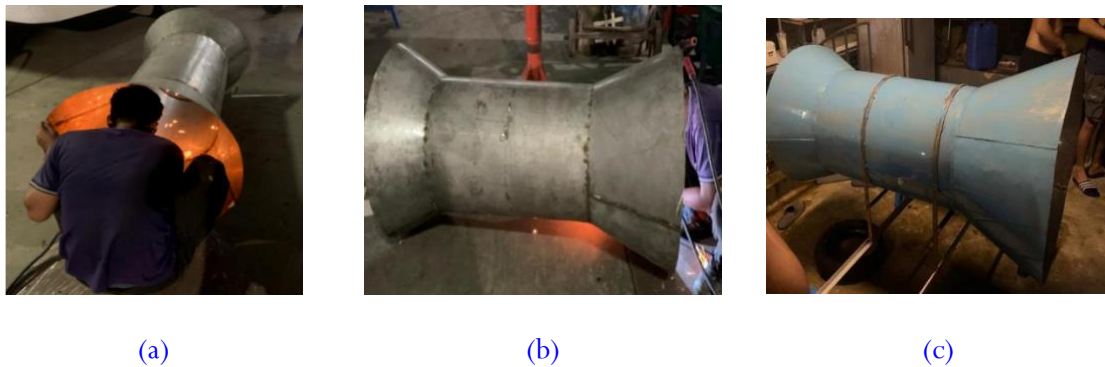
Fabrication process of ducted hydrokinetic turbine. (a) Assembling of parts (b) Final welding (c) Final adjustment of hydrokinetic ducted design
